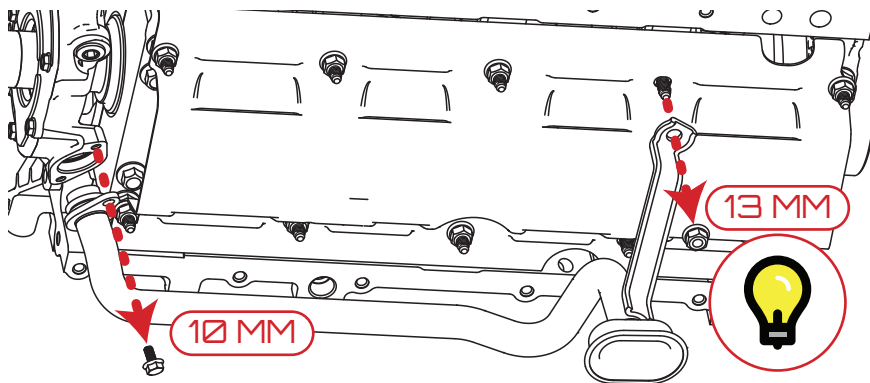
Removing the Factory Oil Pickup Tube (Screen)
